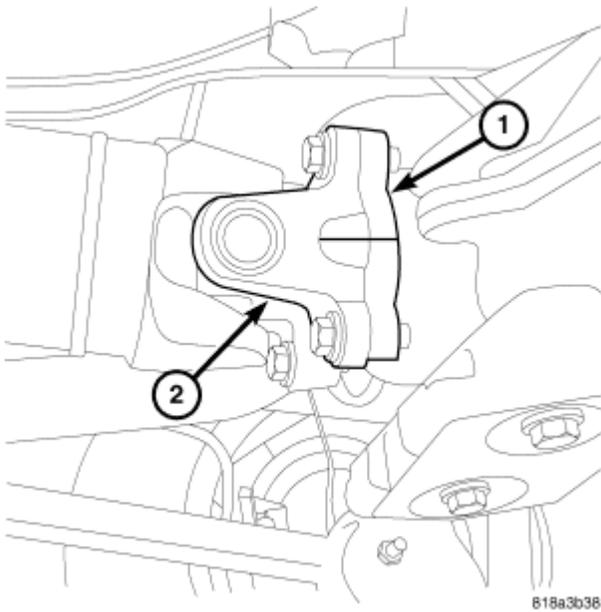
Identifying Line Across Axle Flange & Propeller Shaft Flange
